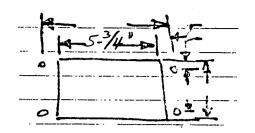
Panel Cutout Dimensions for FILush Mounting.
